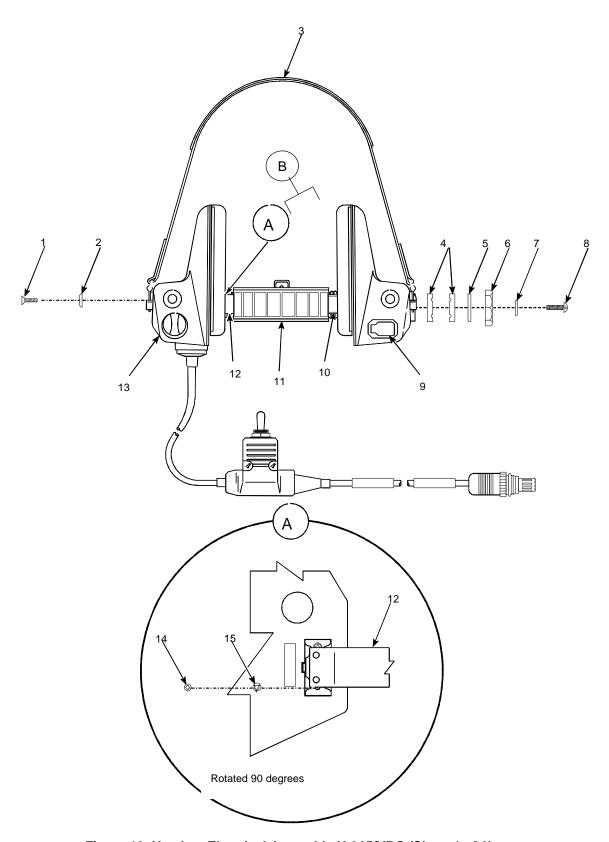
Headset Electrical Assembly H-365/VRC (Sheet 1 of 2)
